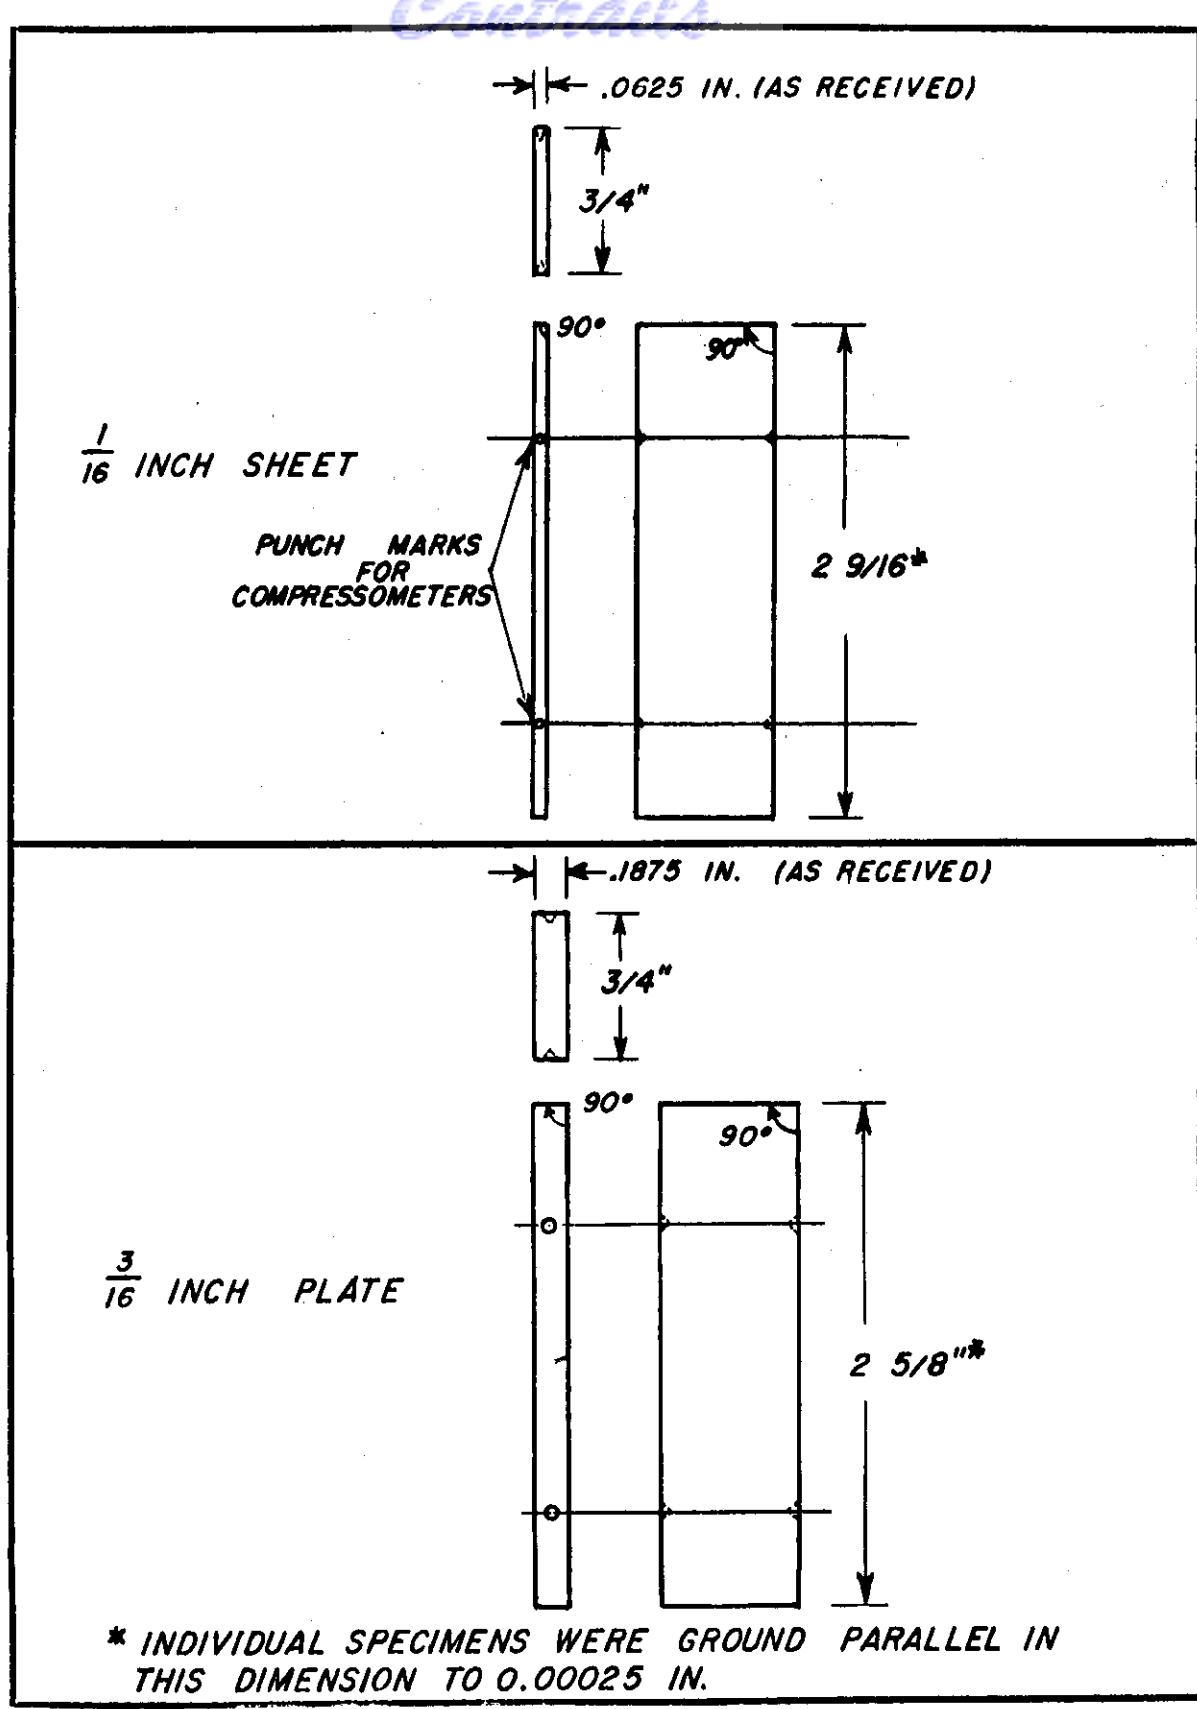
Compression Creep Specimens for Sheet and Plate Material
